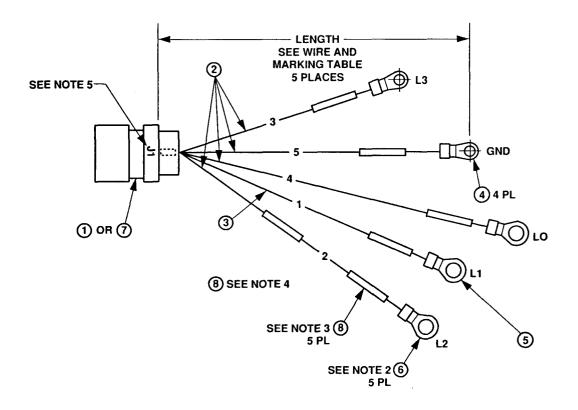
Switch Box Harness Assembly W9 (Sheet 3).
